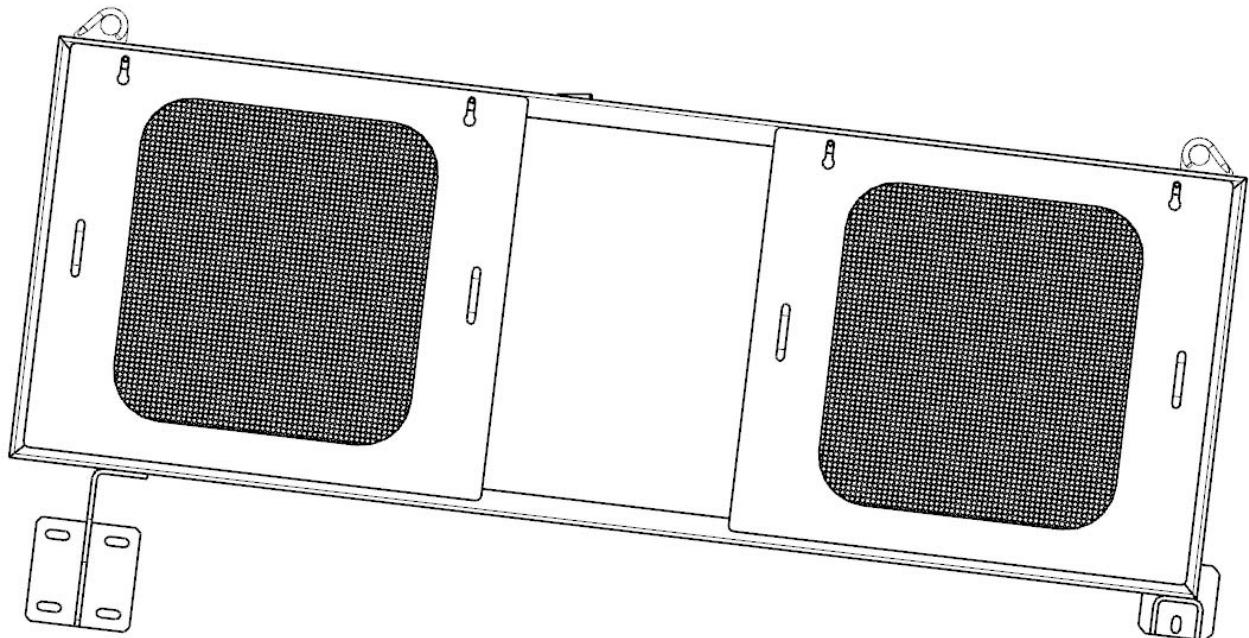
Location of the transmission cover attachment arms (left side assembly)
